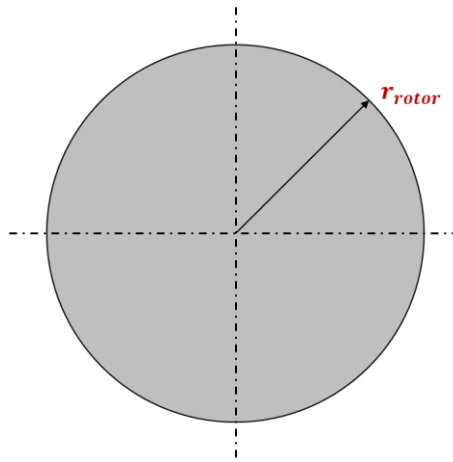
Graphics of the Rotor Pad of the Thrust Bearing
